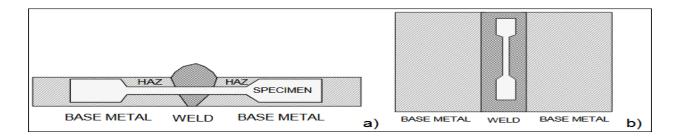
Schematic of tensile specimens from a) transverse section of weld joints and b) all weld specimen
